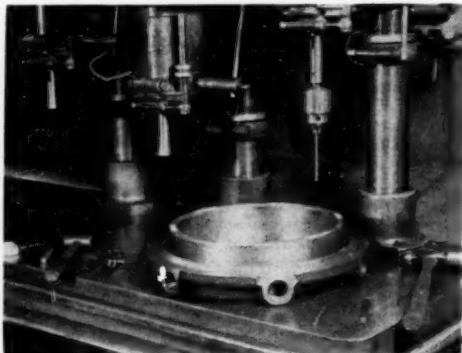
EXPANSION-JOINT GLAND IN POSITION FOR DRILLING PACKING CHANNEL BY OLD METHOD—PRODUCTION RATE 0.77 GLAND PER HR
